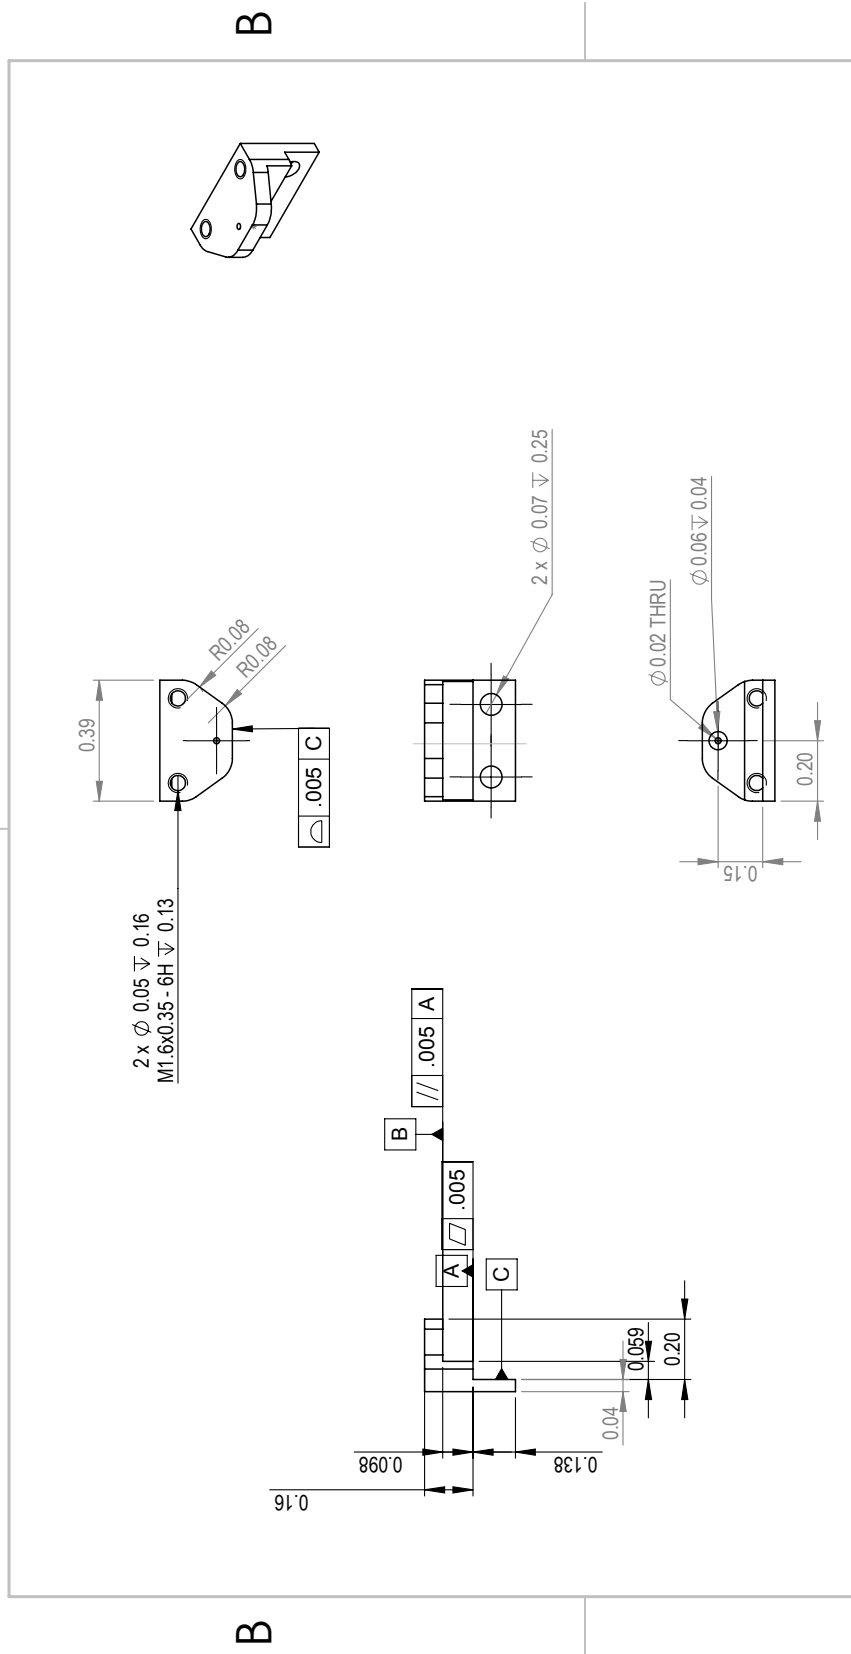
Mechanical drawing for flight version of the CIBER-2 focal plane assembly window pane filter.
